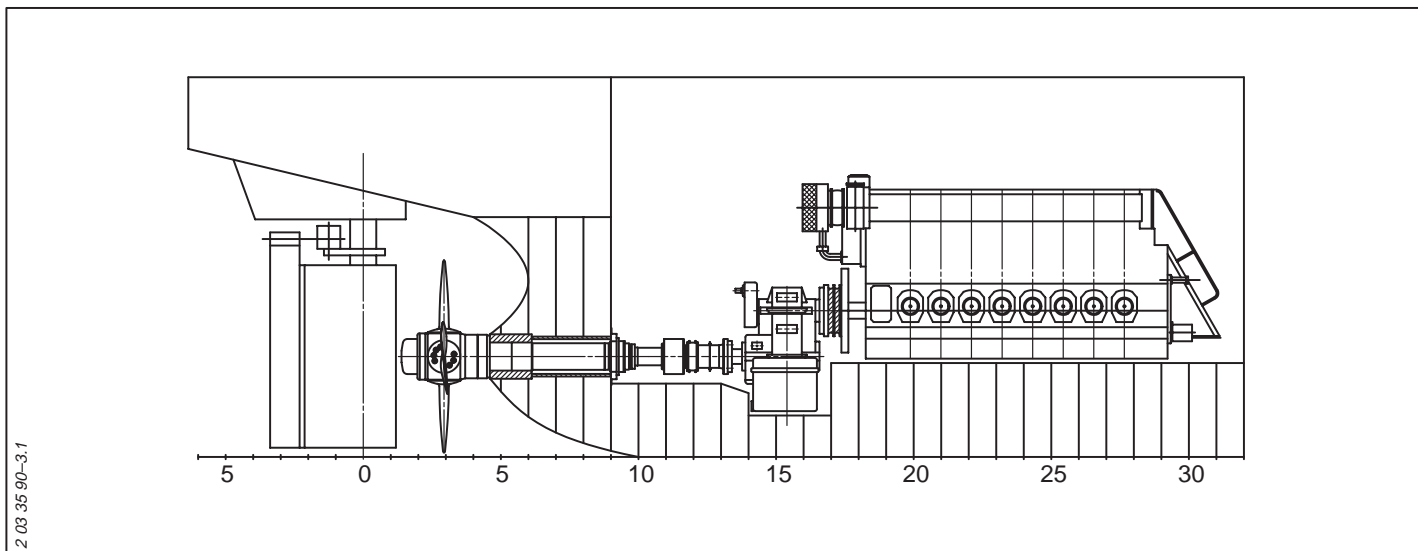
Propeller equipment type VBS (8L40/54, VBS 1280)
